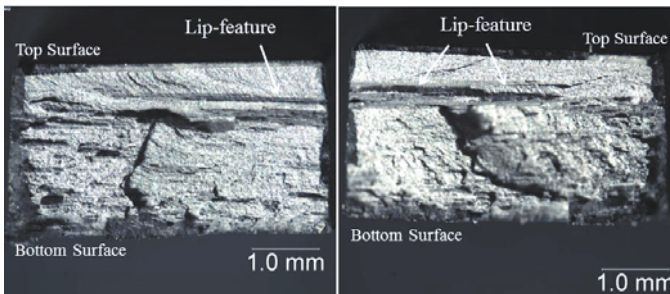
Lip-like features on the fractured surfaces of FSP specimens
